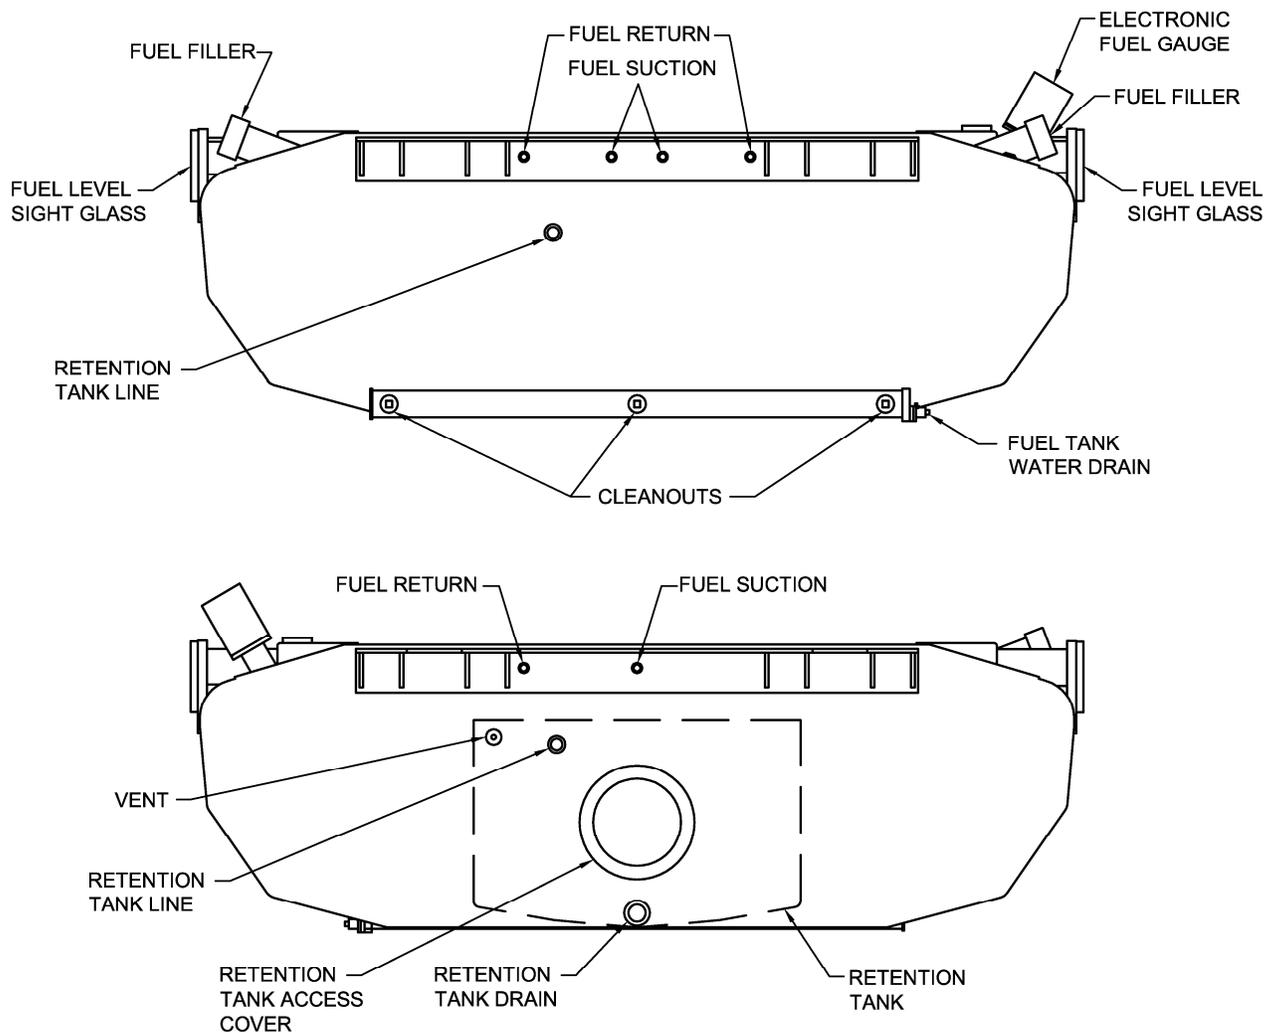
Fuel Tank End Views: Rear (top) & Front (bottom)
